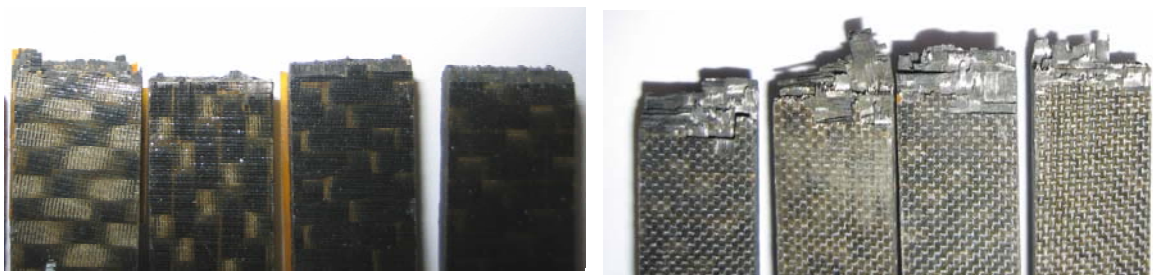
Failure surfaces of Quickstep™ (left) and more brittle autoclave (right) tensile test specimens
